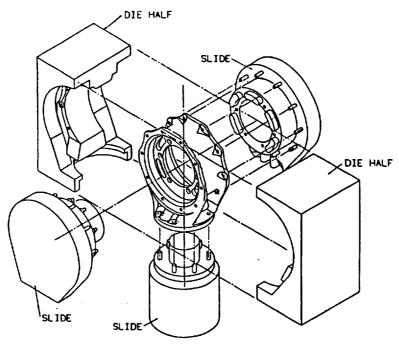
Conceptual Drawing of Outer Housing Die Assembly
